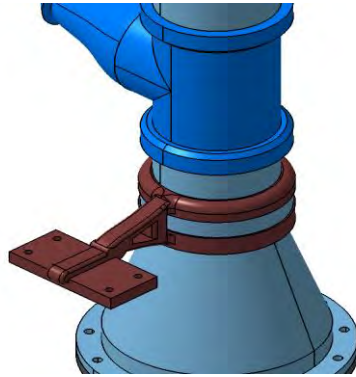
MODULAR SYSTEM-SUPPORT MOUNTING PIECE
